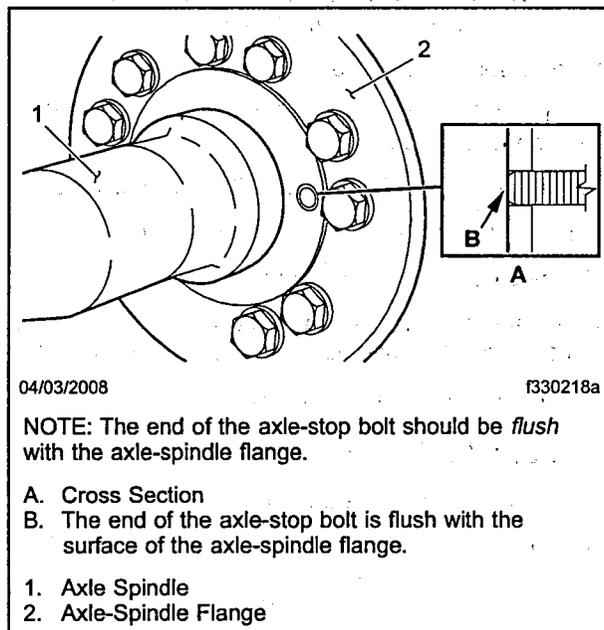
, End of Axle-Stop Bolt Installed Flush with Axle-Spindle Flange
